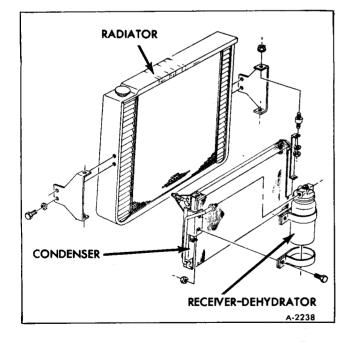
Condenser and Receiver-Dehydrator, Type 1
